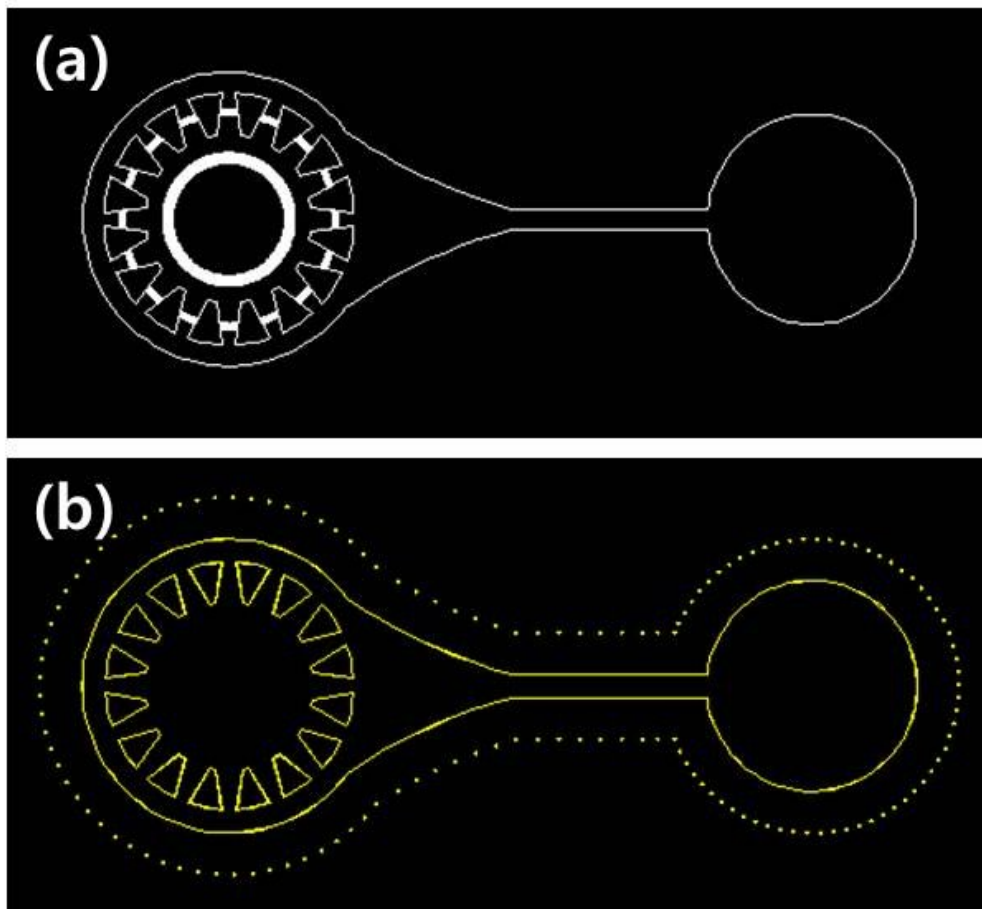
Blueprint of microfluidic devices by drawing with aid of computer-aided design (CAD) and its (a) major structures and (b) welding lines.
